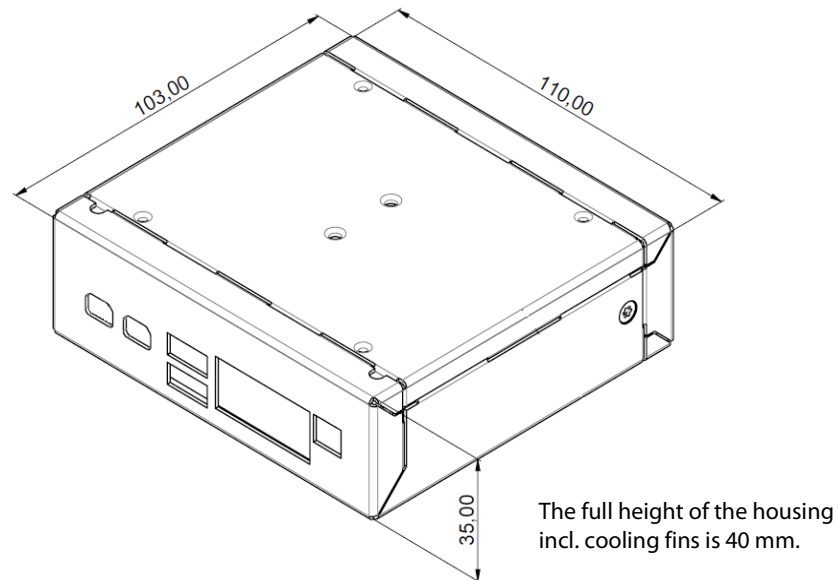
MBox-V-E39 (without D-Sub-9 Connectors), Dimensions (mm), Bottom View
